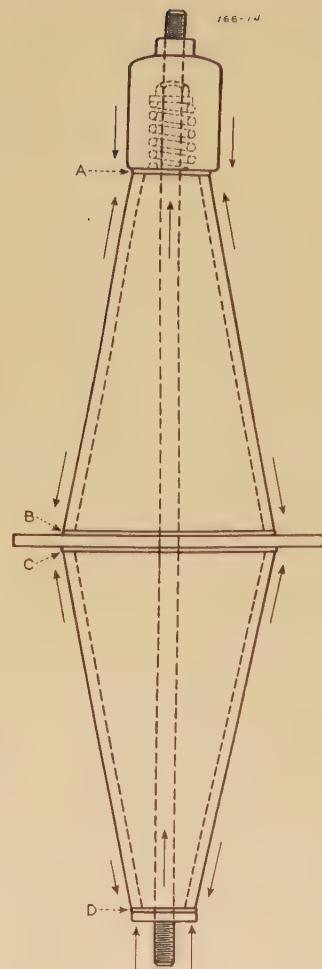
Schematic view of compression assembly showing how gaskets are kept under compression
